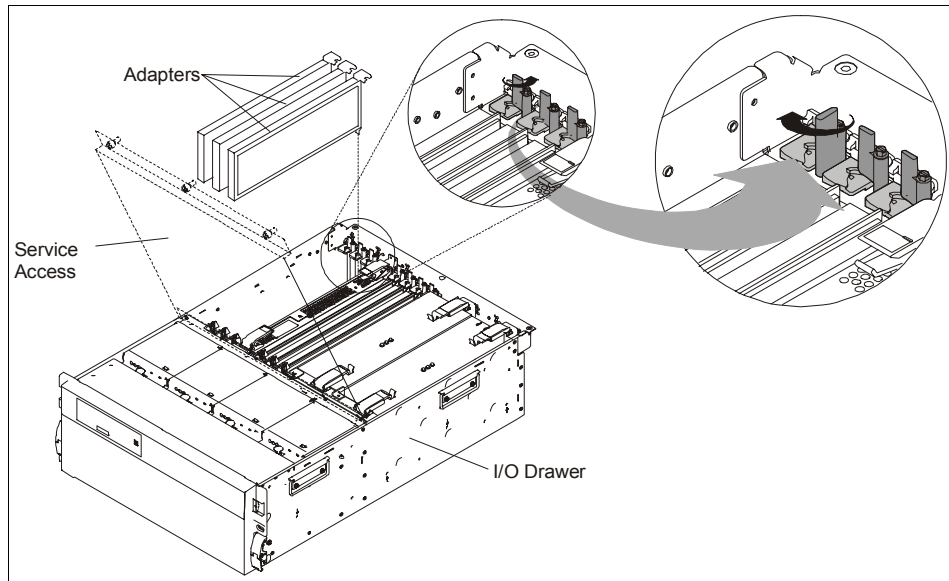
Inside view of 7311 Model D20 I/O drawer
